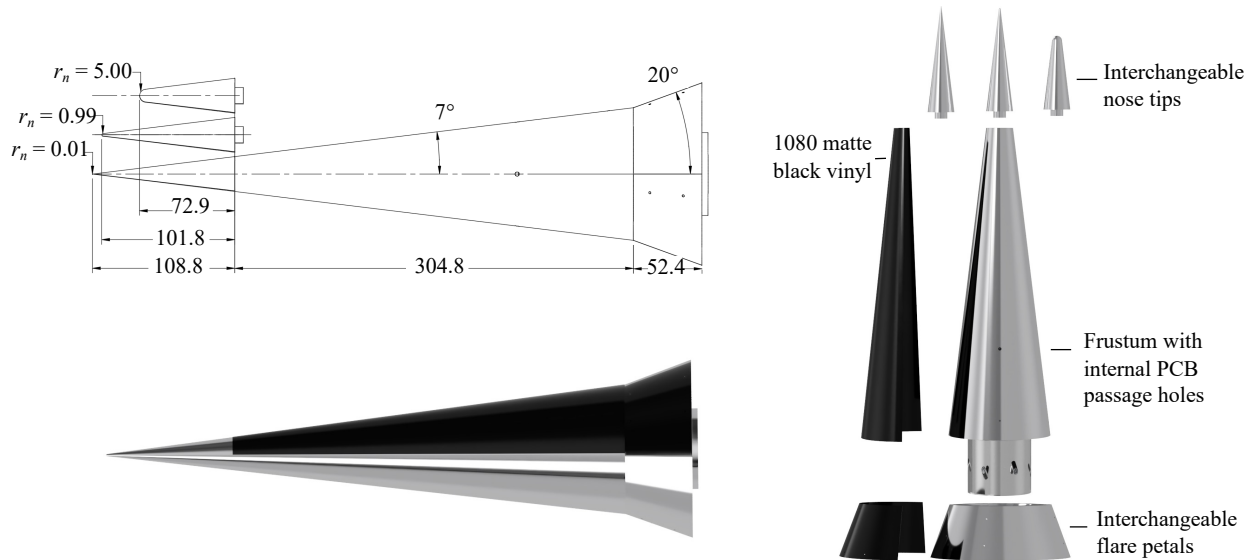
Test article drawing, assembly, and exploded view. Dimensions are in millimeters.
